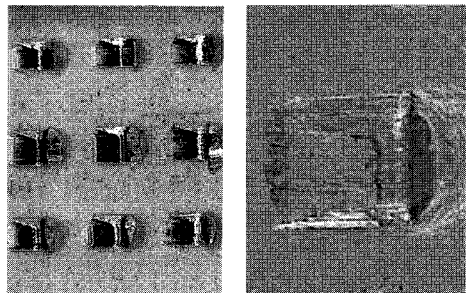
Photograph of toothlike projections on the strap engaging surface by the process using inclined die
